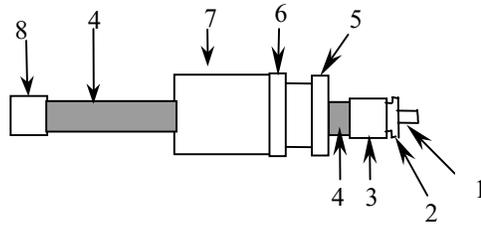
Schematics of prefabrication of transducer internal assembly
